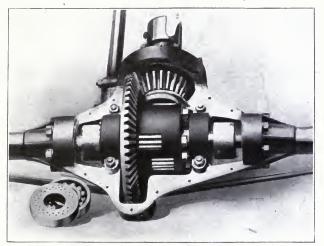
Peerless Differential Gear. Peerless Motor Car Company, Cleveland, Ohio
